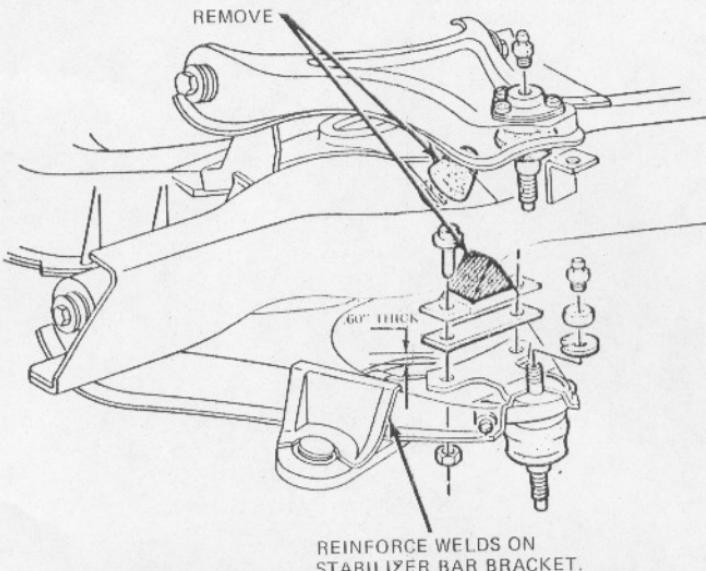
Reinforce welds on stabilizer bar bracket and remove the upper/lower bumpers.
